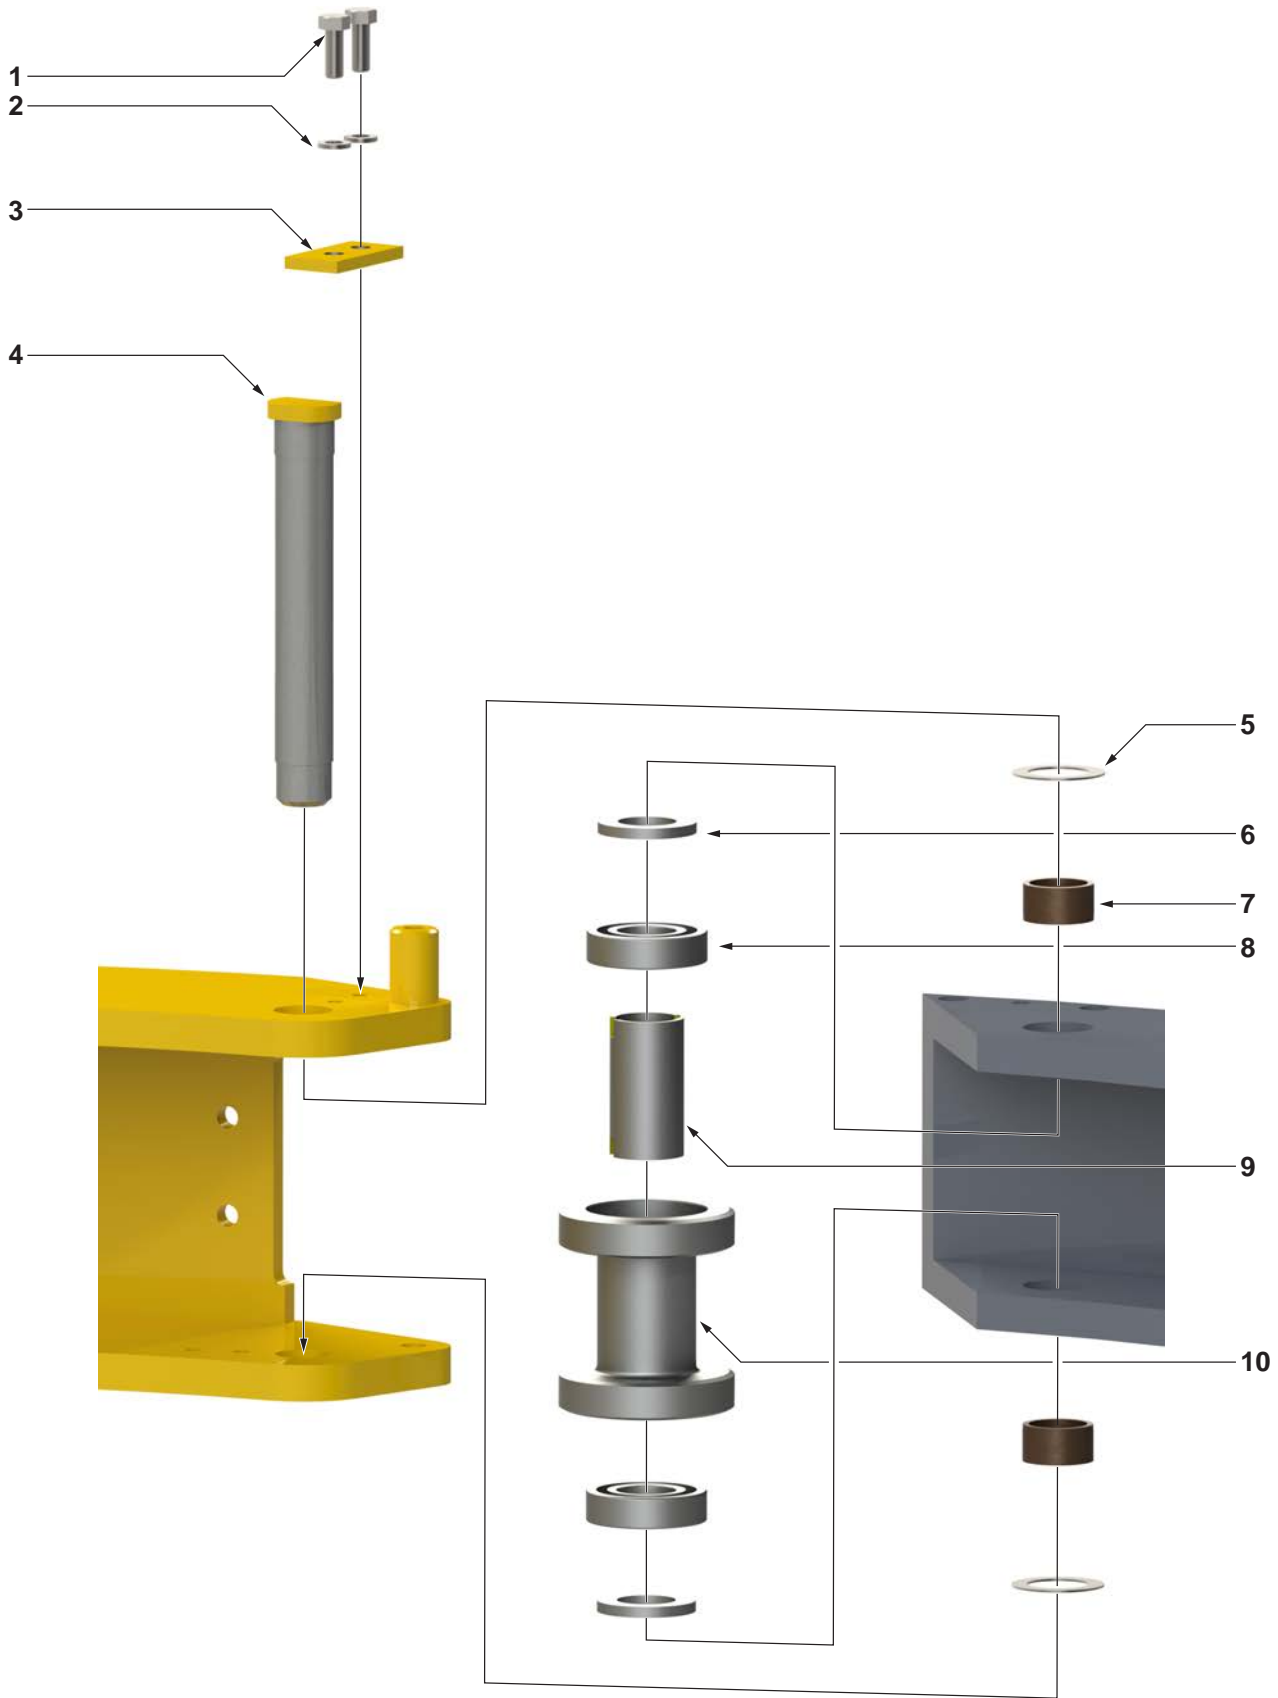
Support Roller (Door-Mounted) Exploded
